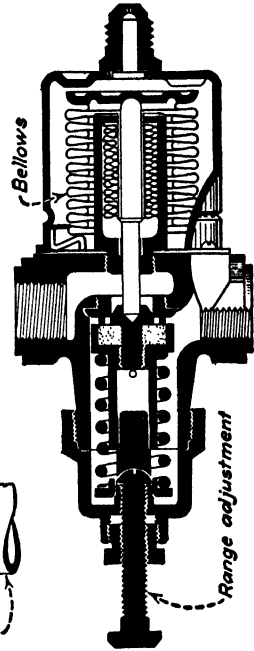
Head pressure from refrigerating compressor acts on the bellows to admit cooling water to condenser. (Courtesy of Penn Electric Switch Co.)
